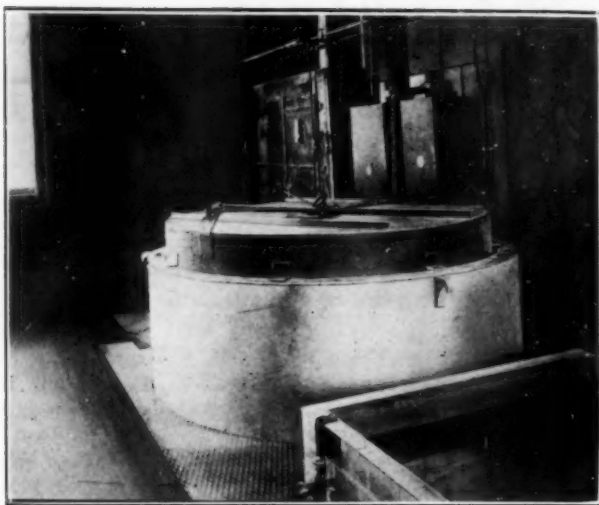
Exterior View of Heat Treating Furnace for Aluminum Alloy Castings
